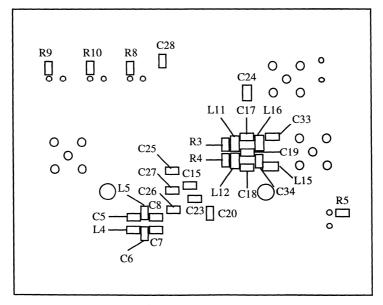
UAA2073XM Demo Board - Layer 2 Assembly
